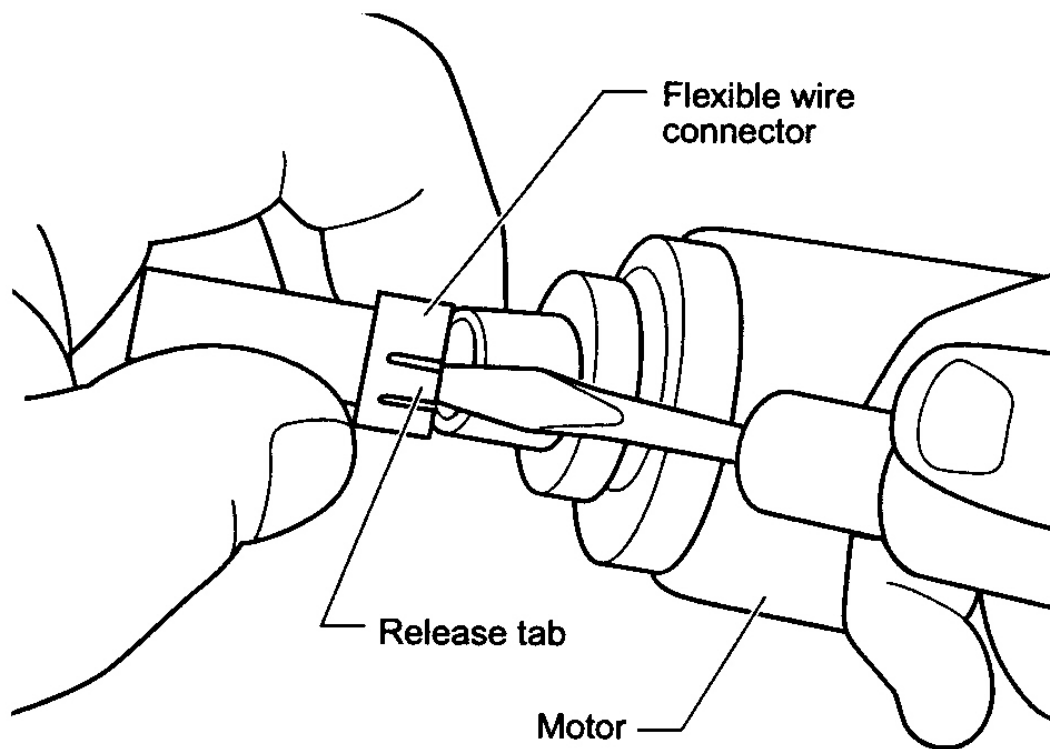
Removing Gears, Wire, Motor & Gear Boxes
